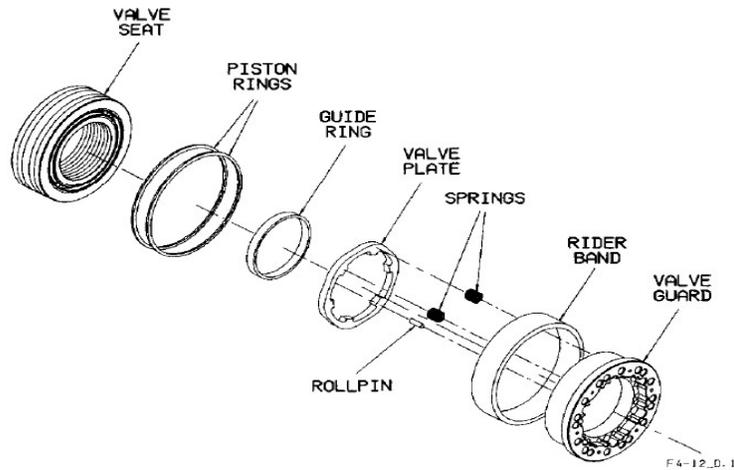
Small Bore "PF/VIP" Valve w/o Damping Plate
